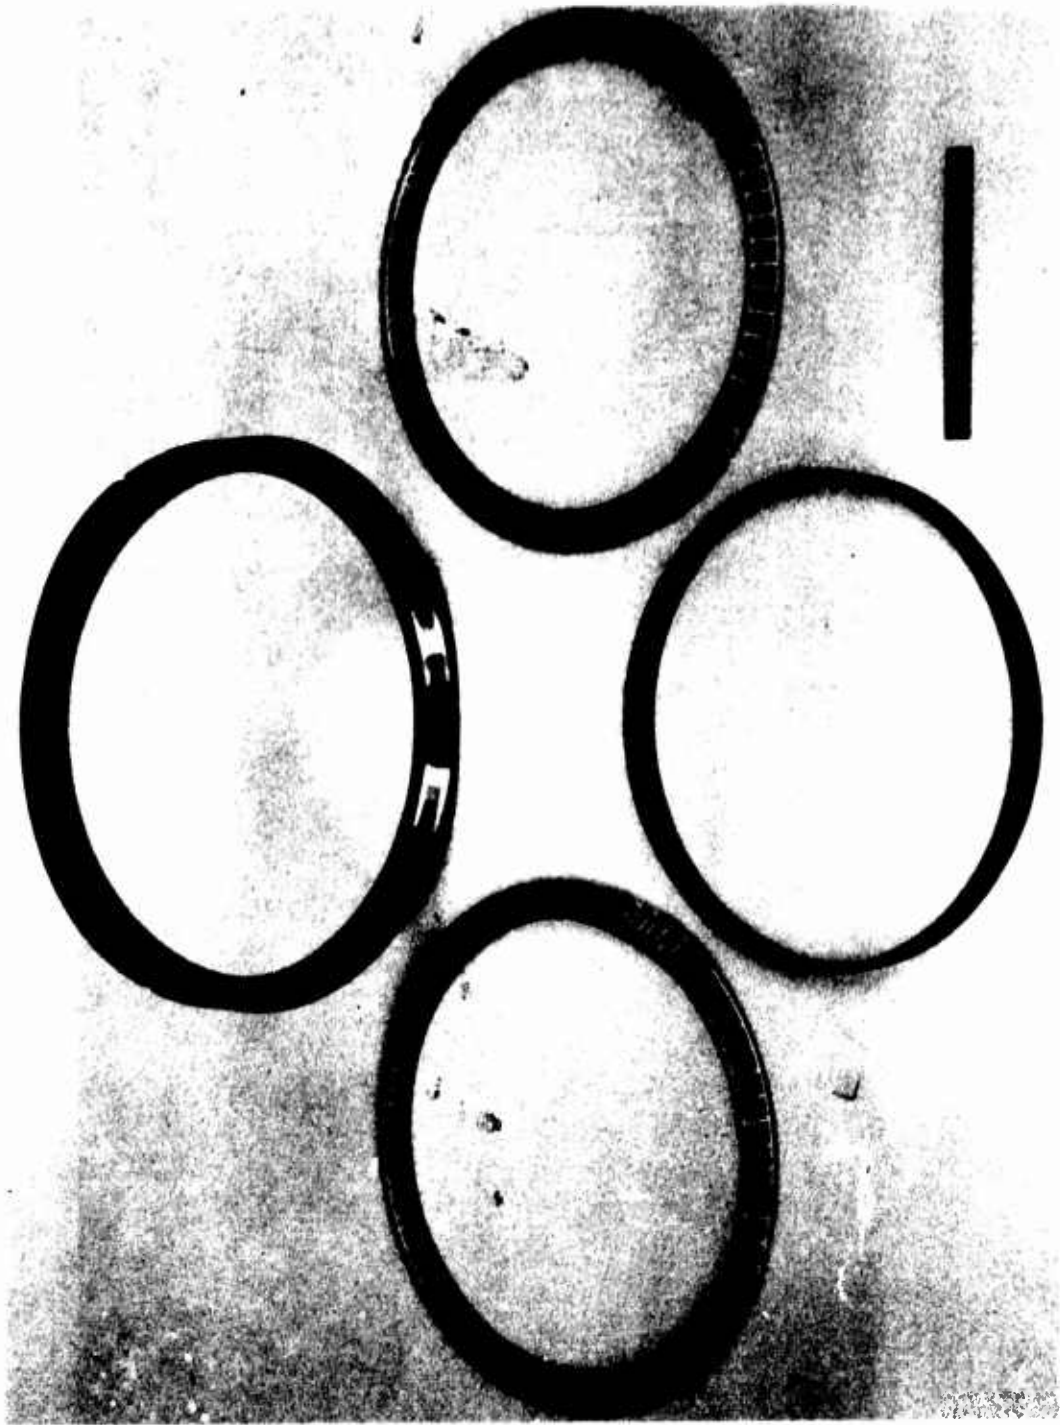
EXPLODED VIEW OF BEARING ASSEMBLY
